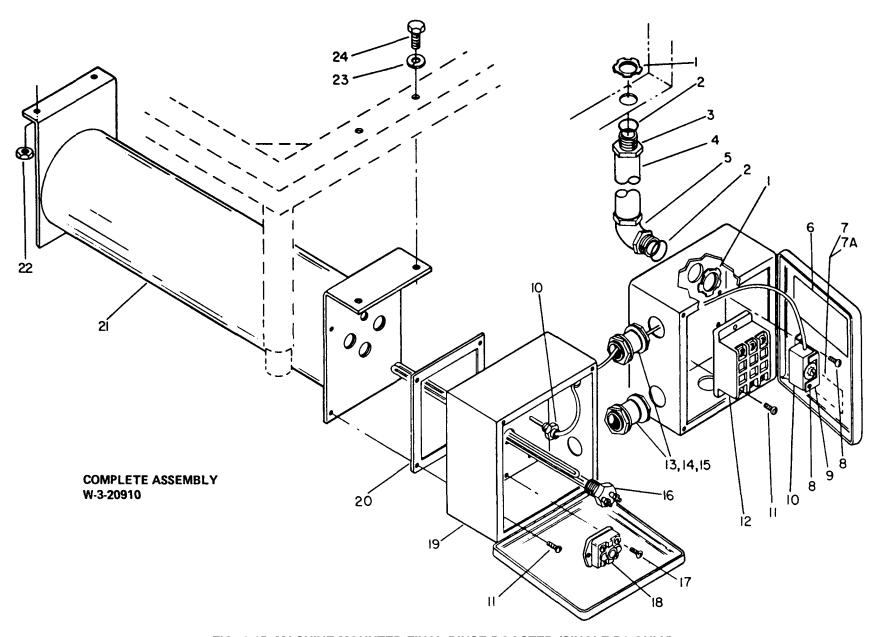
MACHINE MOUNTED FINAL RINSE BOOSTER (SINGLE D8 ONLY)
